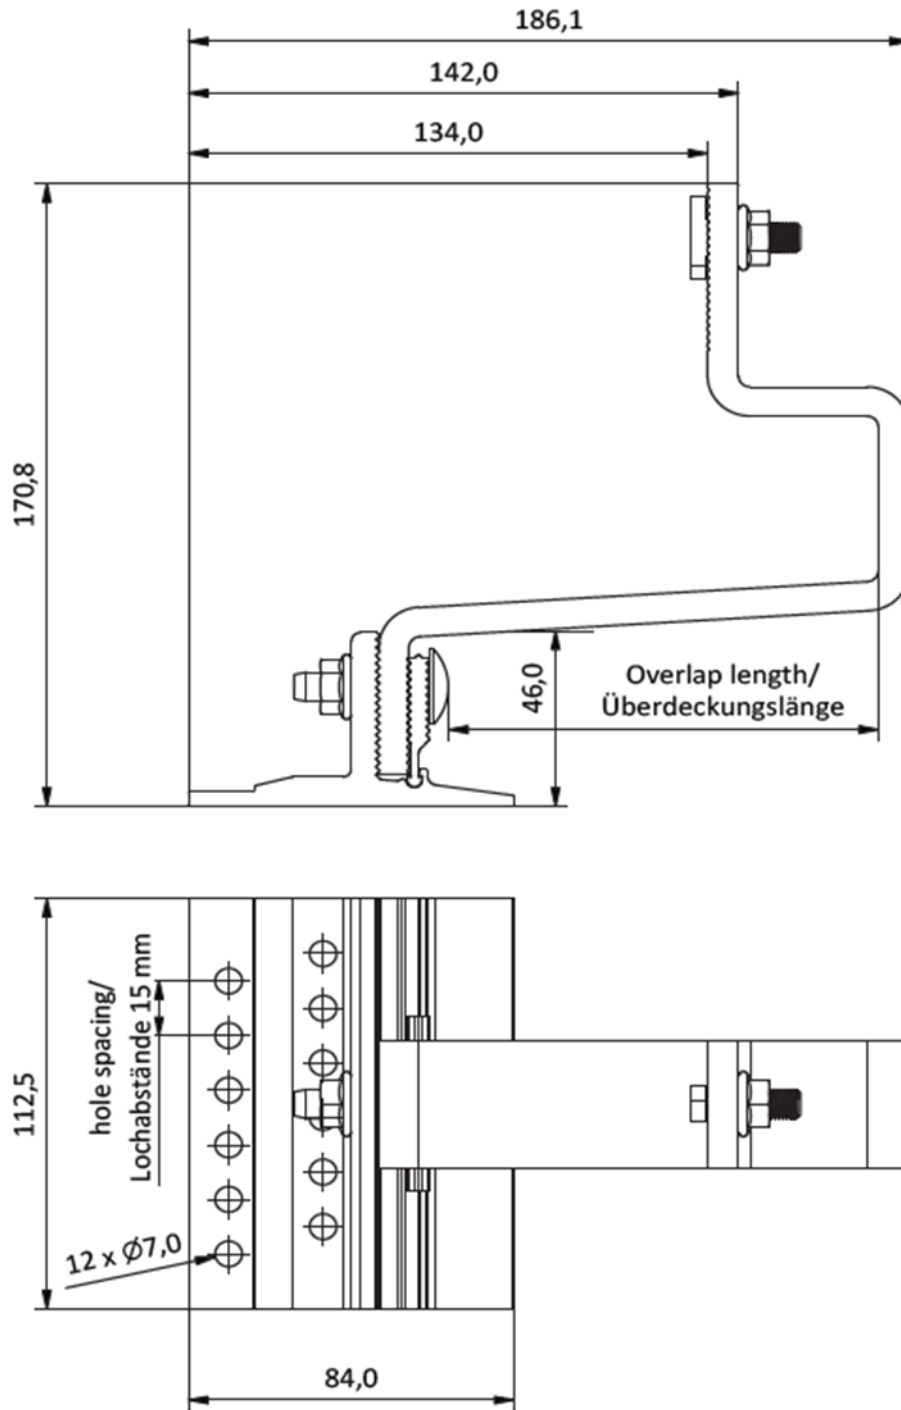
Dimensions in mm of "DH Hybrid 112-7-46 8mm"
